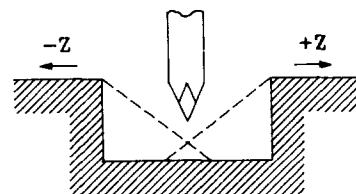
The method of tool path conclusion (Tool No.1, 2, 3)
